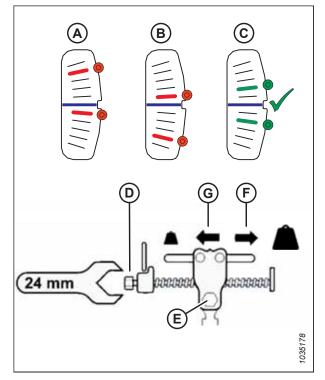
Wing Balance Adjustment – Left Side Shown
